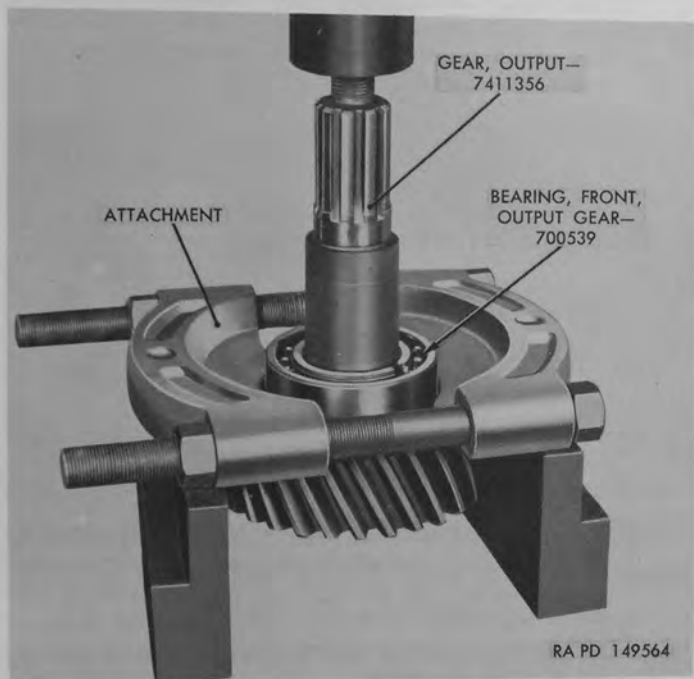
Using arbor press and attachment 41-A-345-328 (part of puller set 41-P-2905-60) to remove output gear front bearing.
